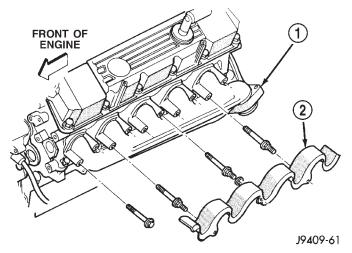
Spark Plug Wire Heat Shields (Left Side Shown)
